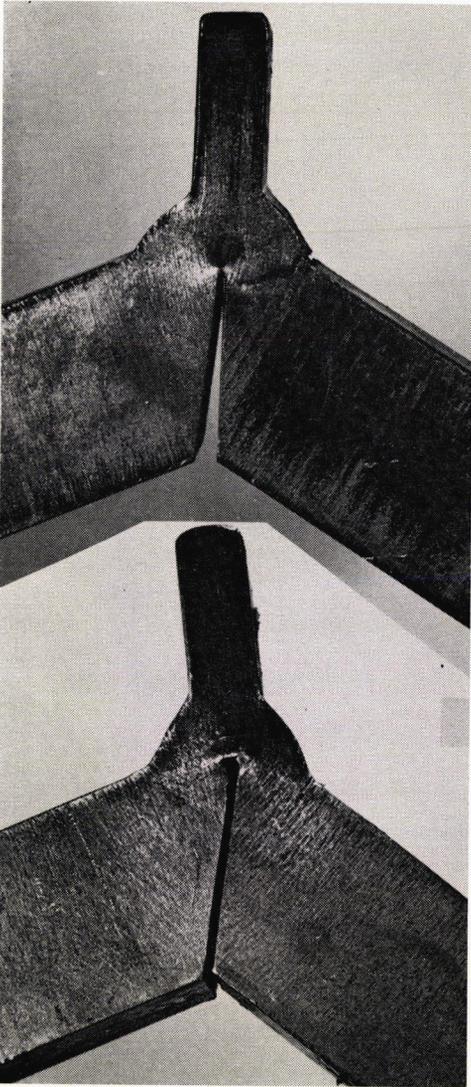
Experimental specimens, showing (top) first simple V-notch tried, which consistently caused failure of fillet toe, and (bottom) second modification with notch milled out to relieve the center and raise the neutral axis toward the flange fillet toe. Elongations and angles improved, but failures remained consistently in the fillet toe region.
